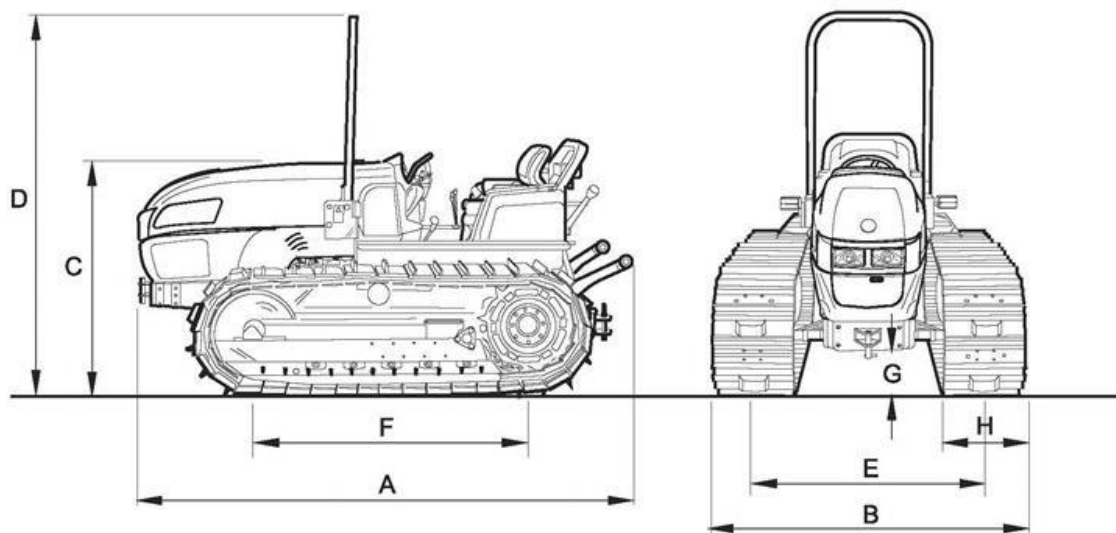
Principal dimensions of a Category C track-laying / crawler tractor
